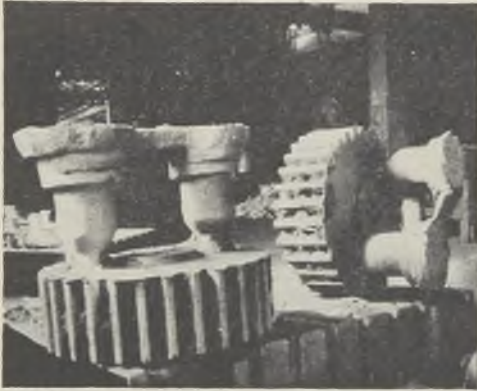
LARGE GEARS MADE IN HIGH-TENSILE CAST IRON WITH "BOTTLE" HEADS.
